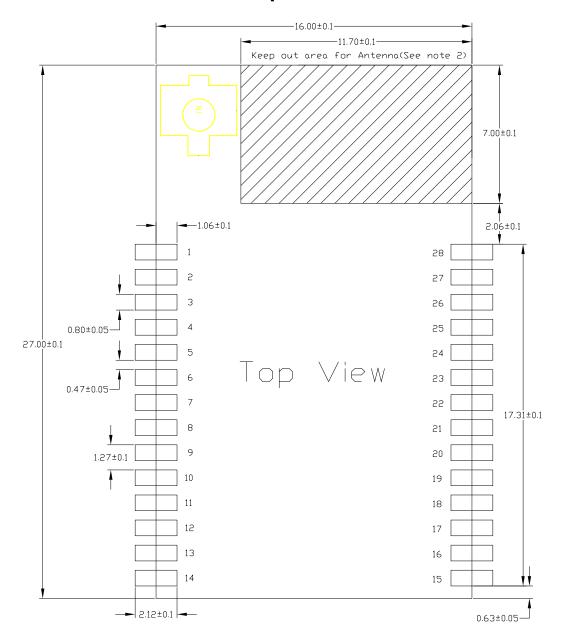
DFZM-E82xx Module Recommended PCB Footprint (in mm)
